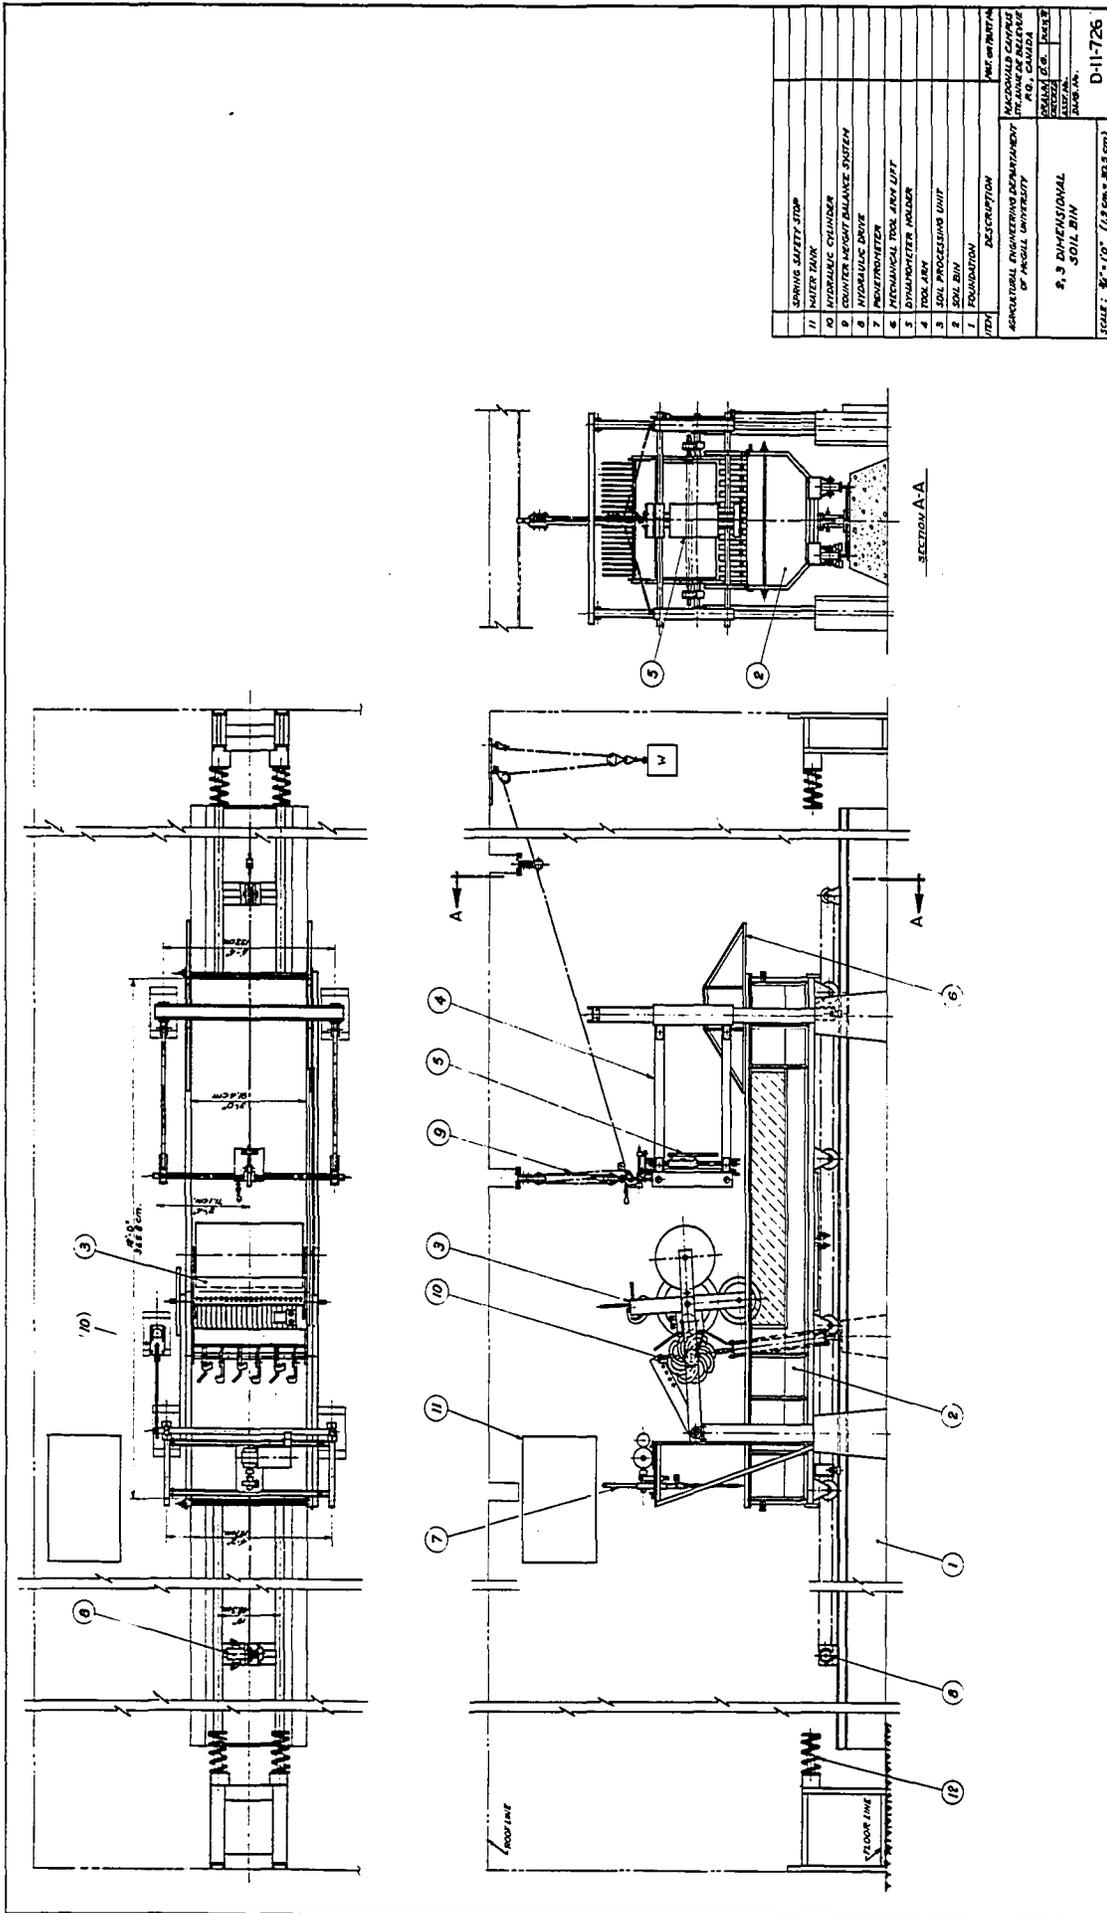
Overall View of 2 - 3 Dimensional Soil Bin.
